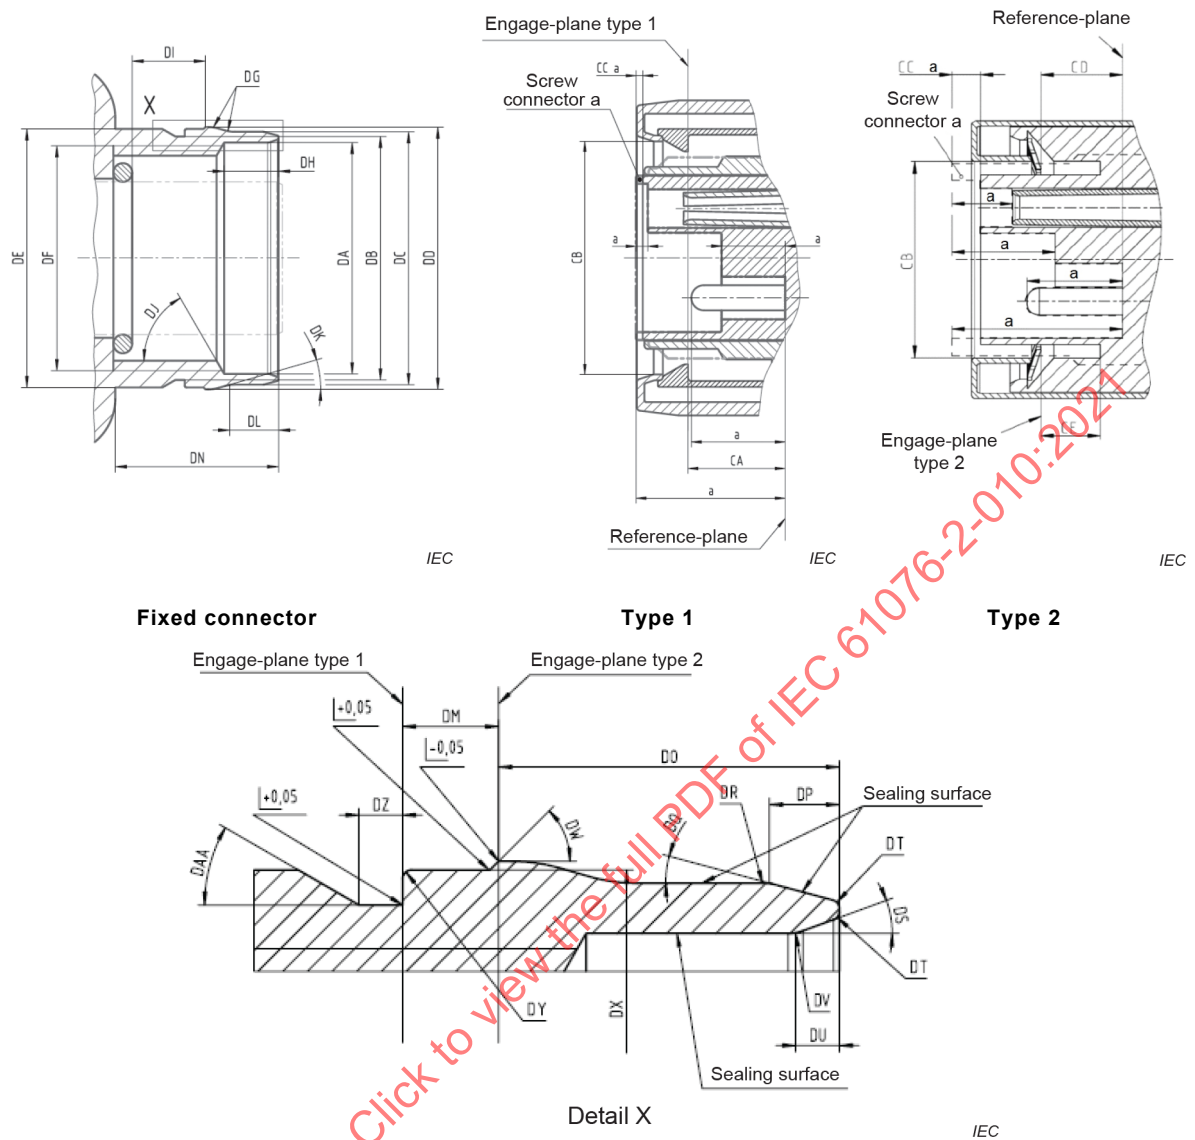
Outer push-pull locking: female fixed connector side view with details and engage-plane definition for male free cable connector
